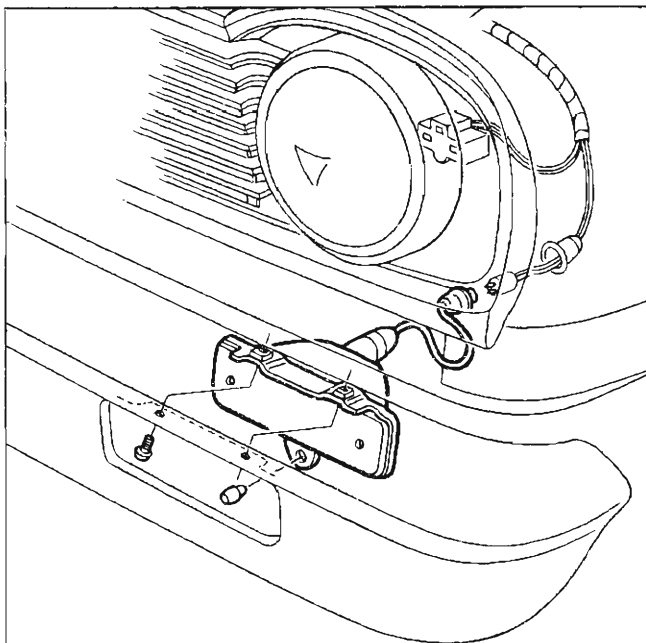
Parking Lamp Assembly—Chevy II Shown
